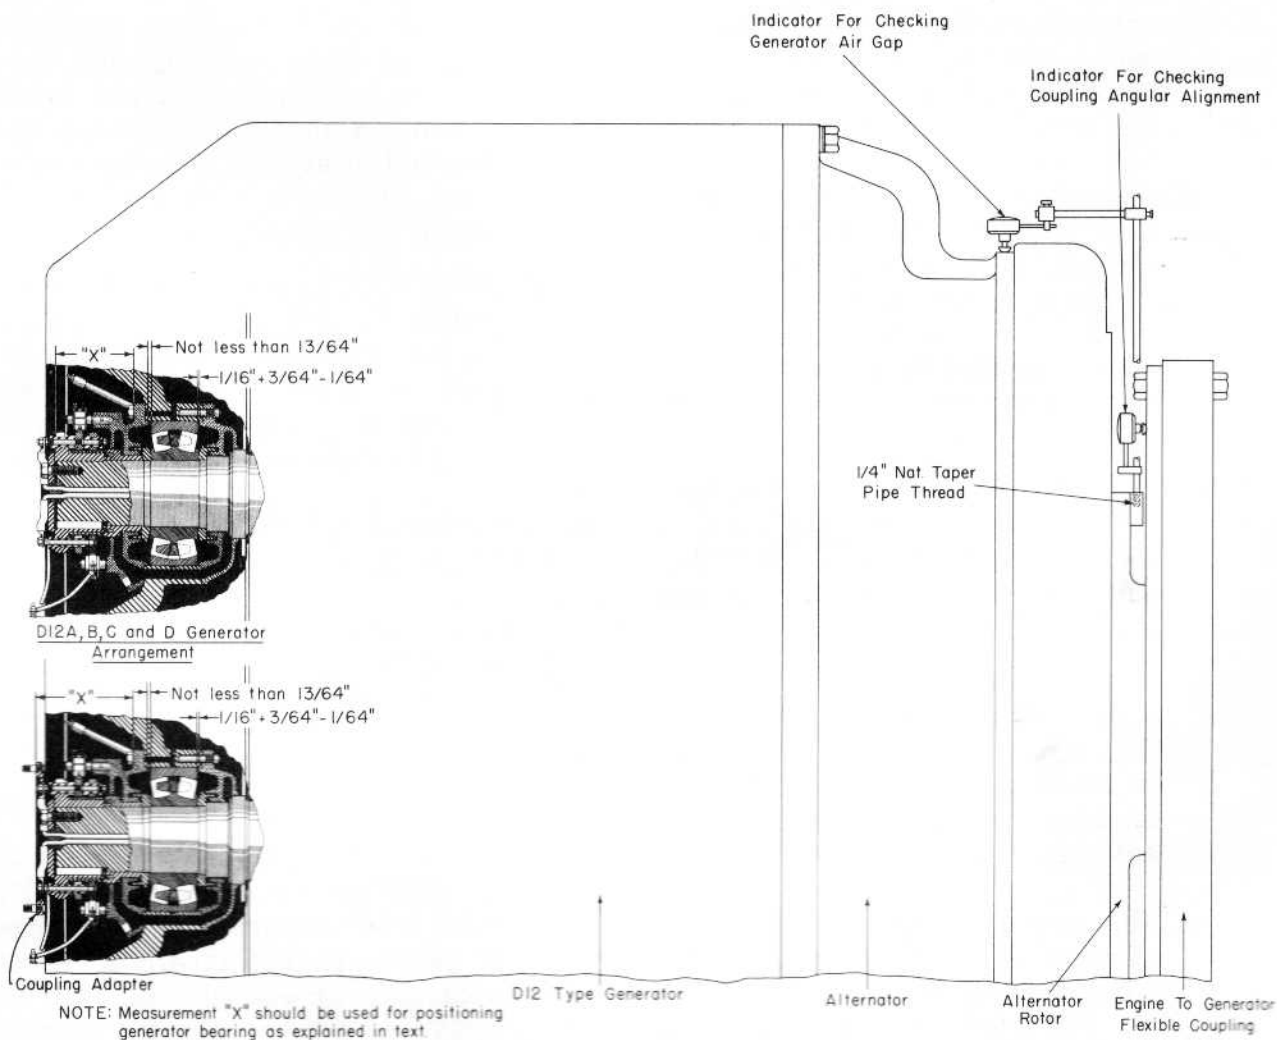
Generator Alignment Information Model D12A, B, C And D Generators
